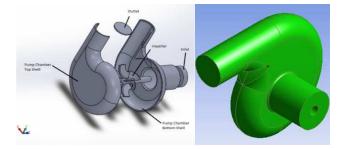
Exploded view of the pump chamber and impeller constructed in SolidWorks (right) Fluid body generated in Ansys DM (left)
